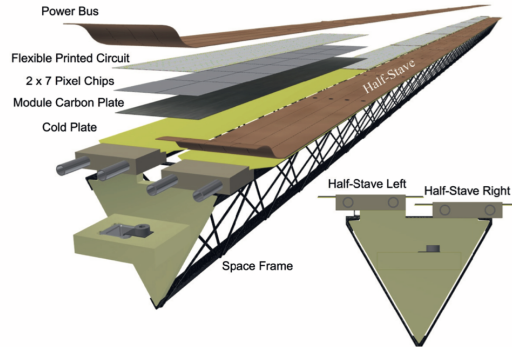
Schematic exploded view and cross section of the Outer Barrel Stave [67].
